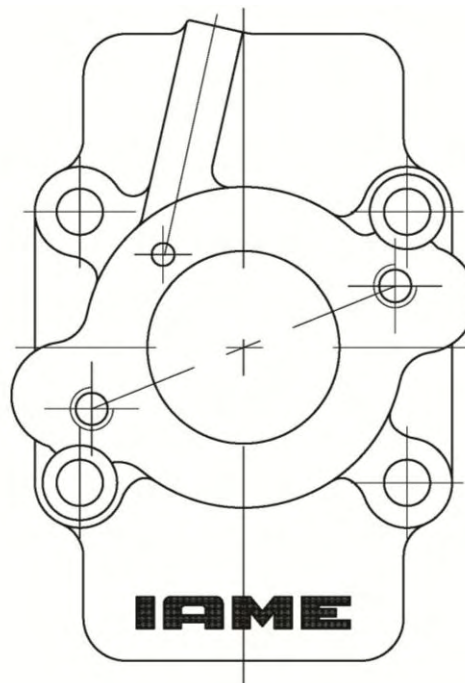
PHOTO IDENTIFICATION CARBURETTOR INLET CONVEYOR
